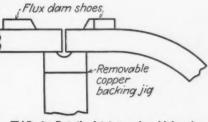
Detail of joint and weld bead for joining spun aluminum head to
